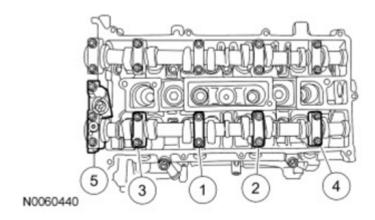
Identifying Camshaft Bearing Cap Bolts Tightening Sequence
